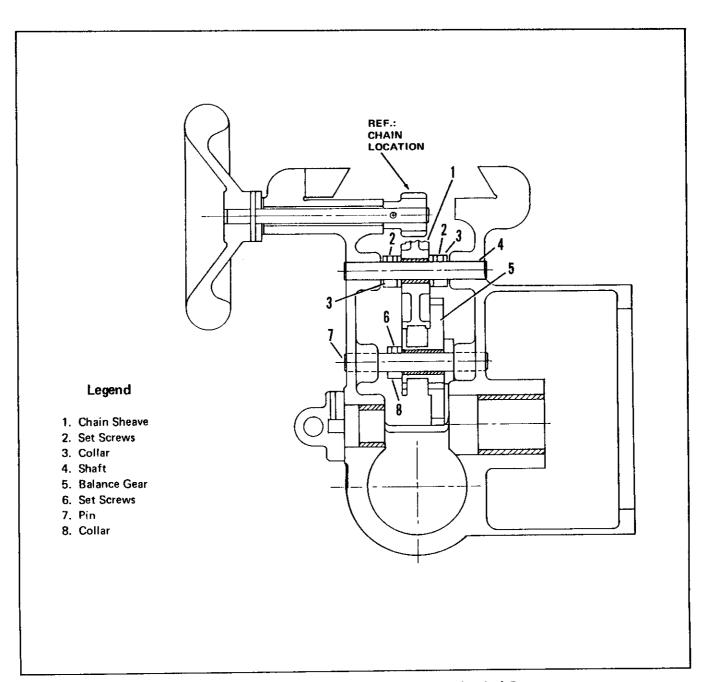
Removing Counterweight Chain, Sprocket And Gear
